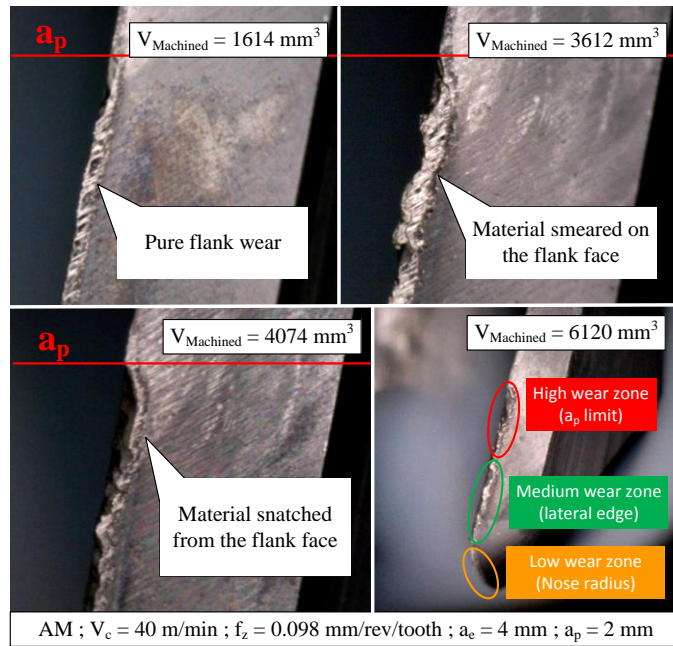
Tool wear observation from flank wear to cutting edge collapse in end milling of AM Inconel 718.
